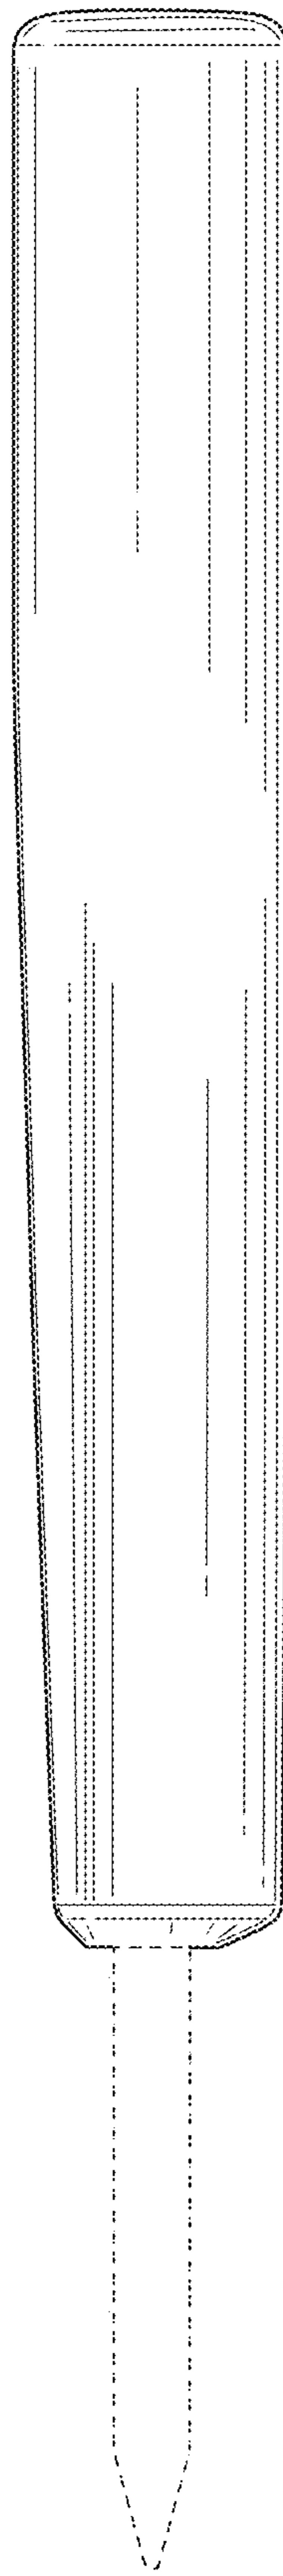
is a left side elevational view of the screwdriver of FIG. 1;
